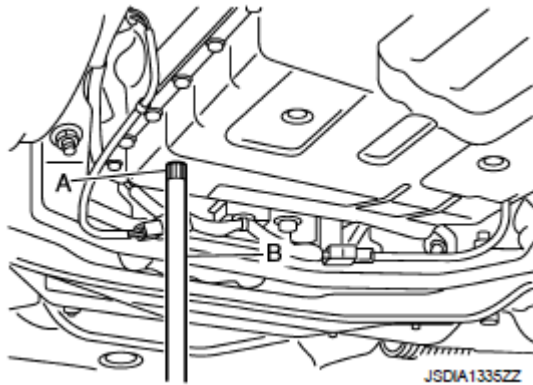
Installing Charging Pipe To Overflow Plug Hole
